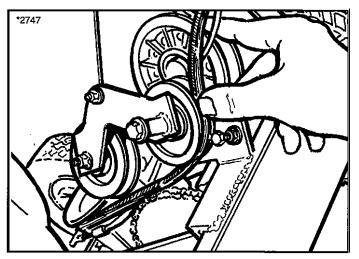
Wrap Drive Belt Around Lower Idler Pulley And Angled Pulley
